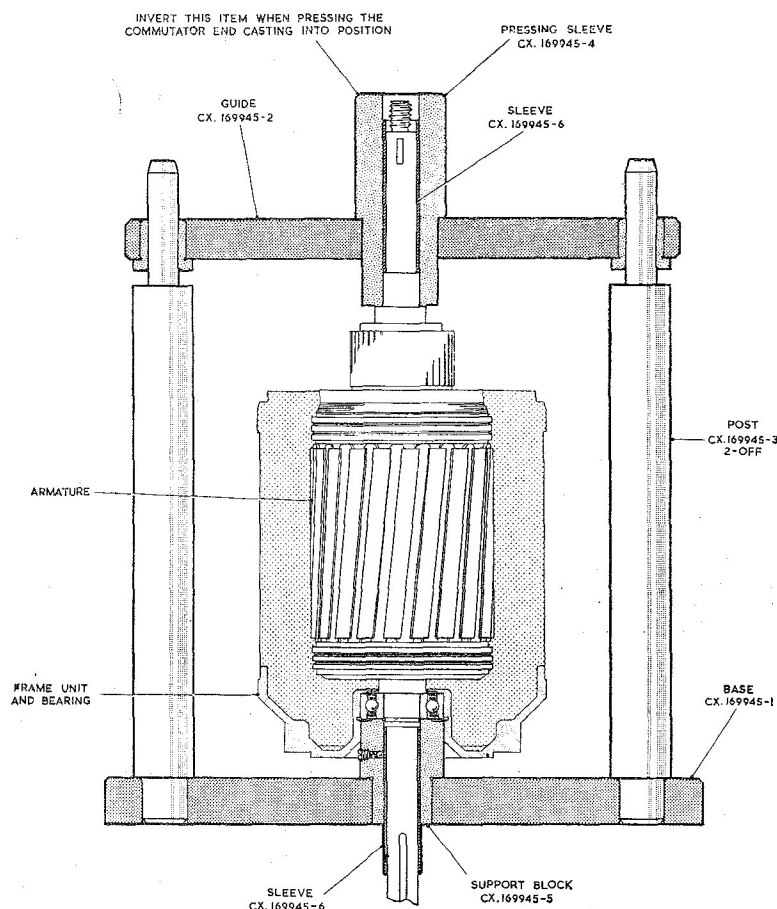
Fixture for assembling the armature, and the commutator-end units on to the frame unit assembly
